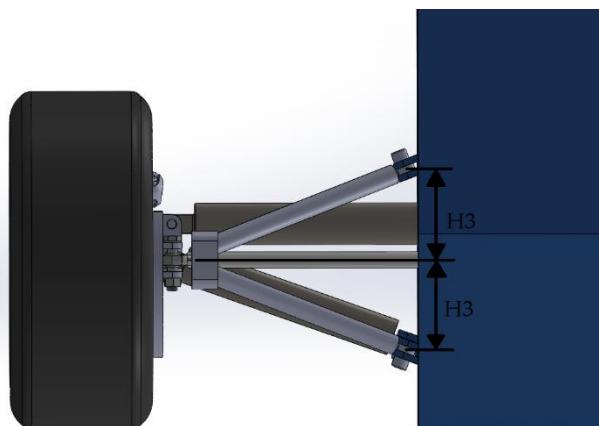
Geometrical Dimensions – Top View (Front Suspension).
